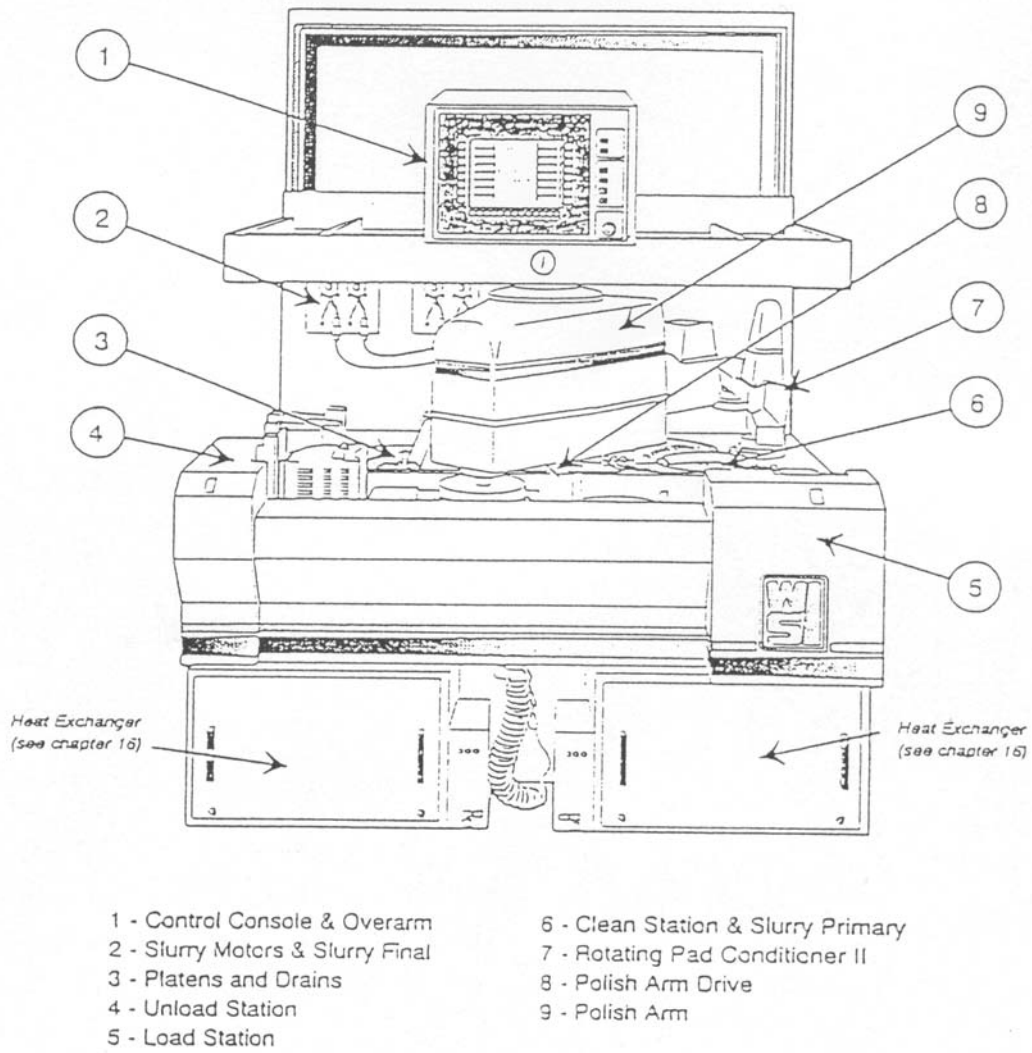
The Perspective Front-View of CMP System- Westech 372M Machine
